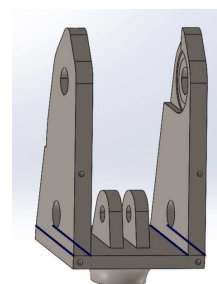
Demonstration of the location of the femoral part of the knee mechanism's welding seams
